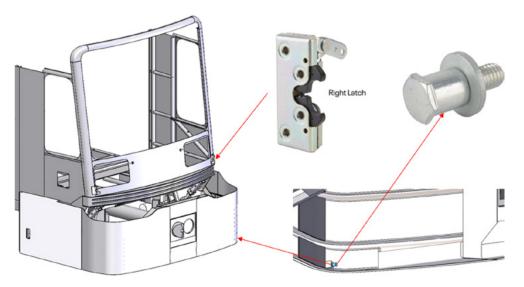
Mechanical Latch for Locking the Front Enclosure When Retracted
